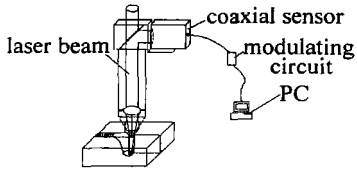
Experimental setup of laser butt welding with gap defect
